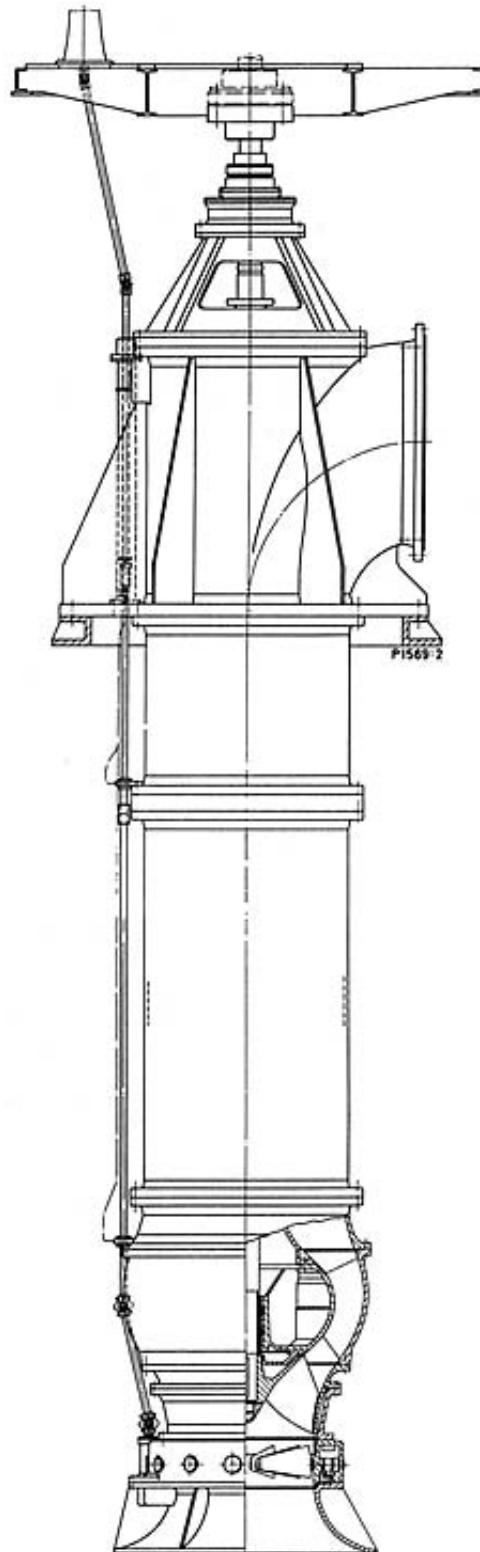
Helical impeller tubular casing pump with inlet-vortex regulation device.
